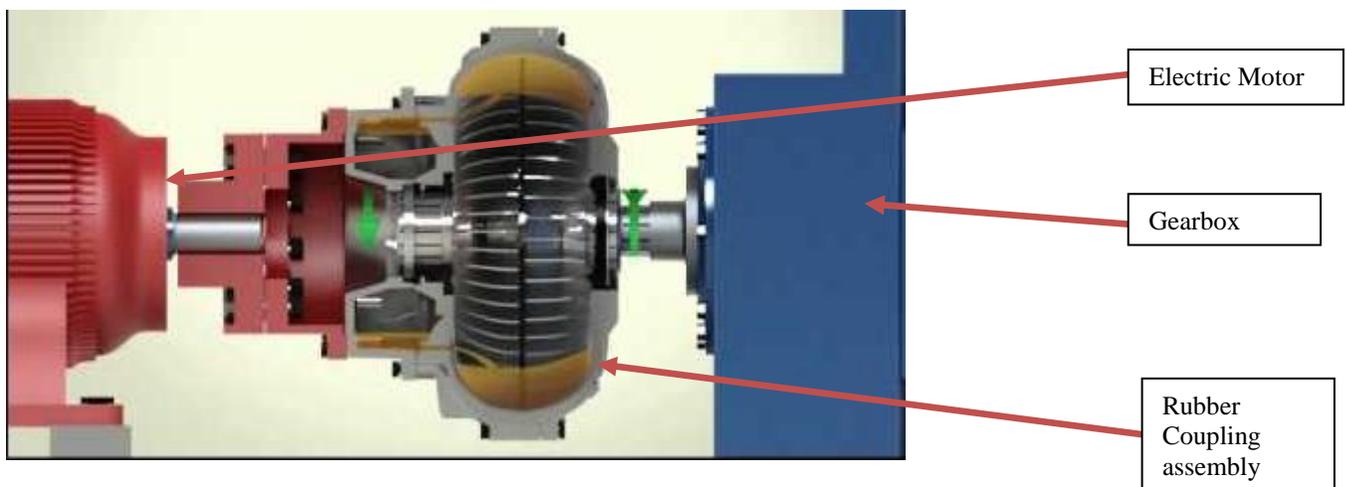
Coupling Arrangement between gearbox and motor (Muganyi 2017)
